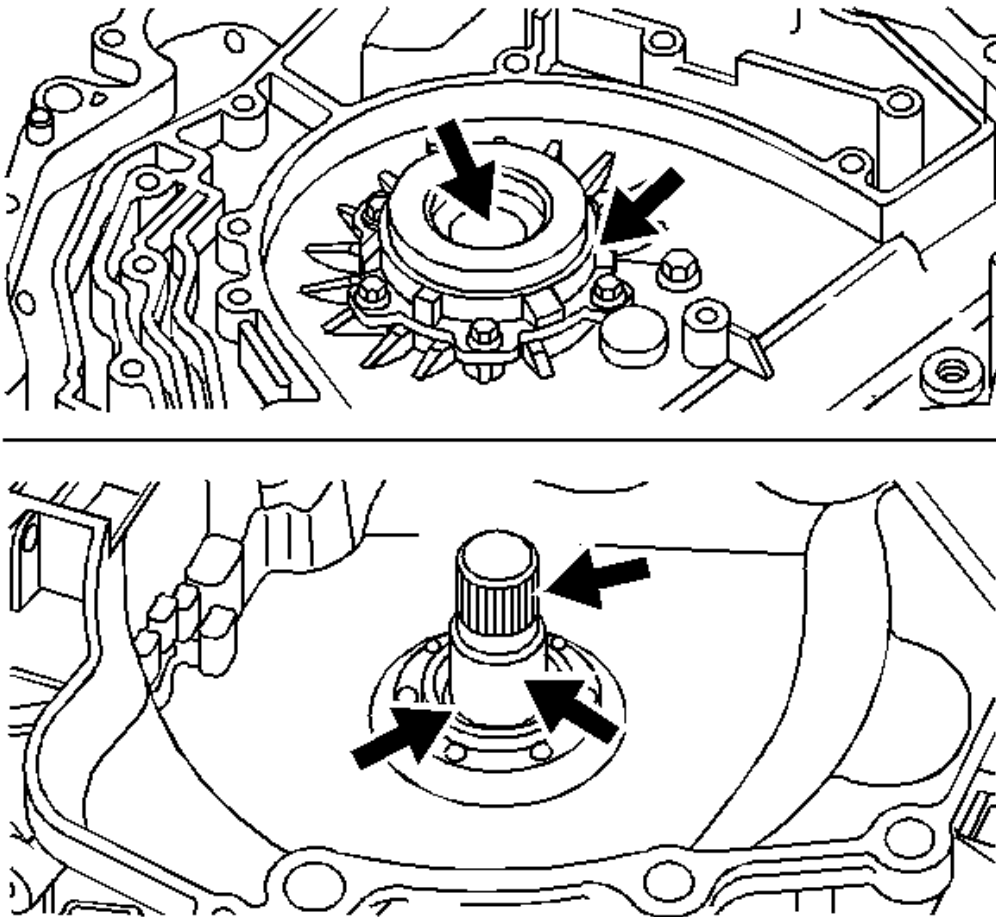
Locating Inspection Areas Drive Sprocket Support
